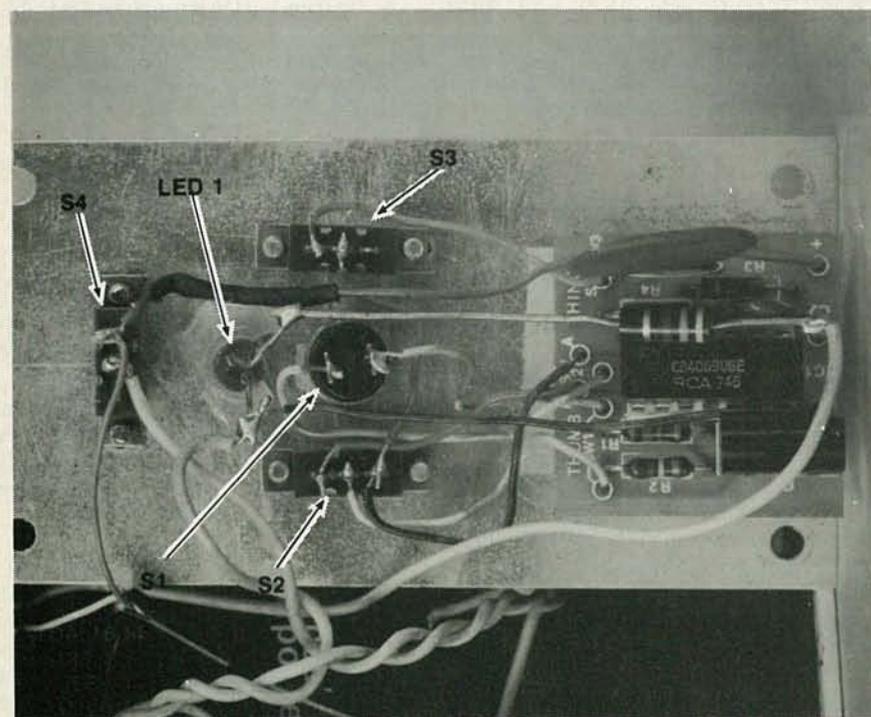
SWITCHES AND LED are mounted from component-side of PC board. Switch mounting nuts secure assembly to top of case.
